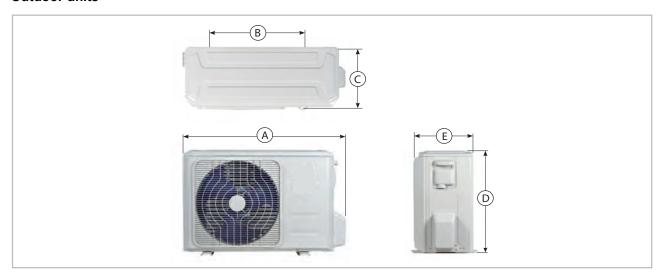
Outdoor unit ATY 266-356 DC AT dimensions
